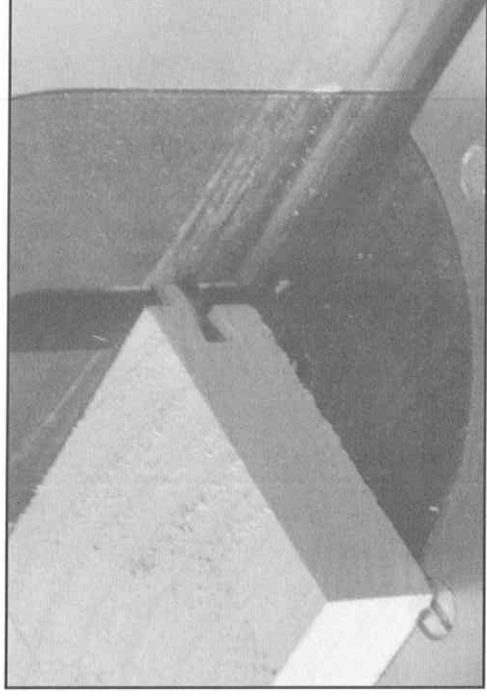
Make the lower pin cut by moving the workpiece from left-to-right.
